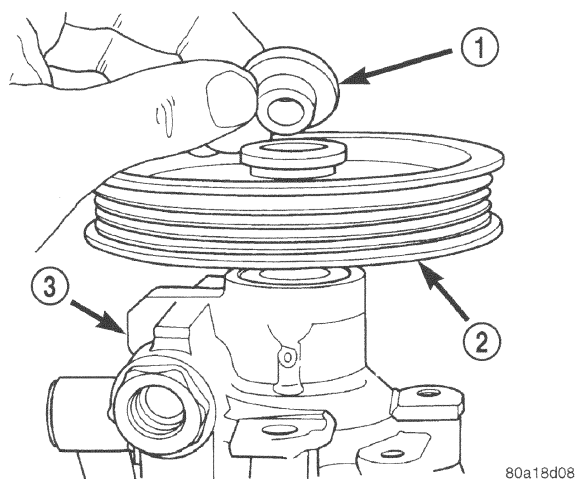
Pulley Positioned On Shaft Of Power Steering Pump
